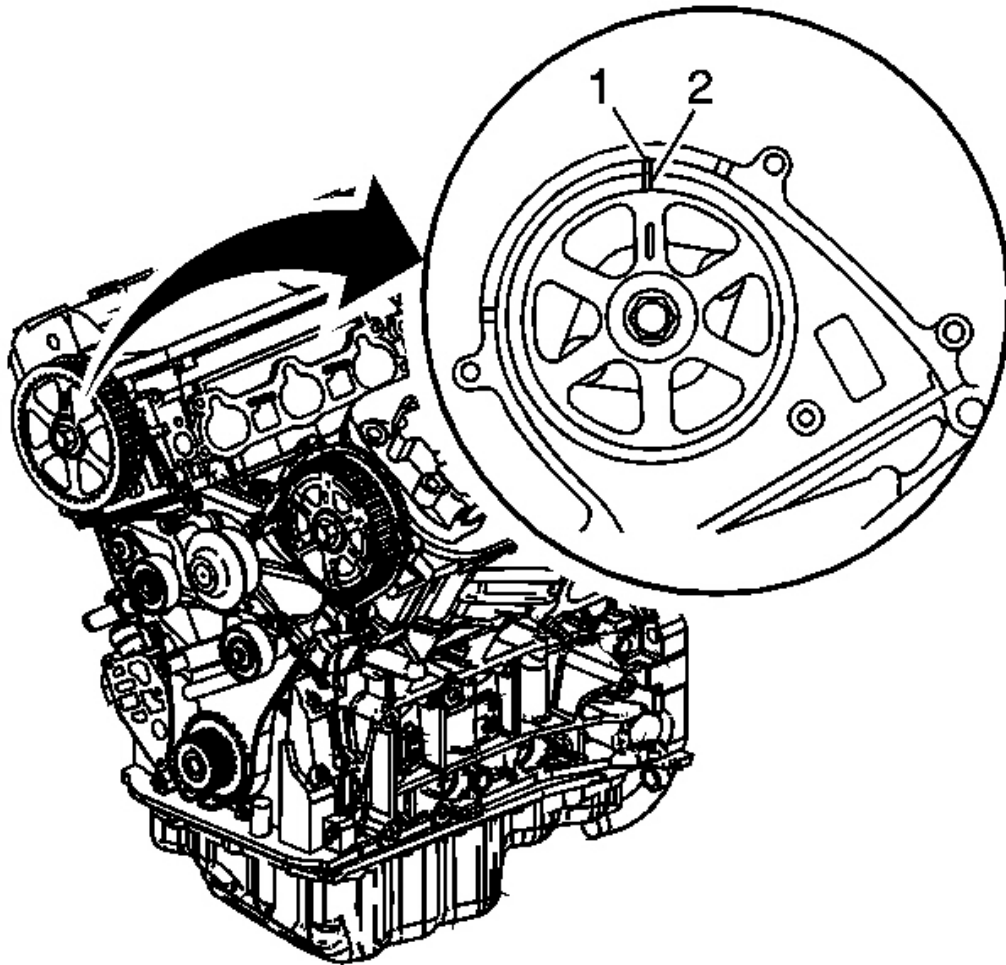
Aligning The Mark On The Sprocket With The Pointer On The Rear Cover
